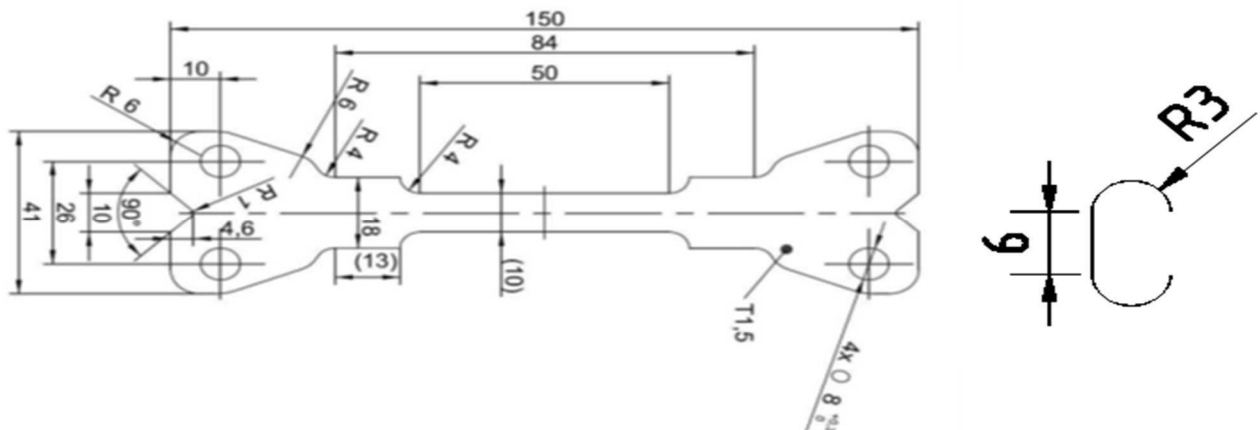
Drawing of the test specimen (left) and dimensions of the C-shaped weld (right)
